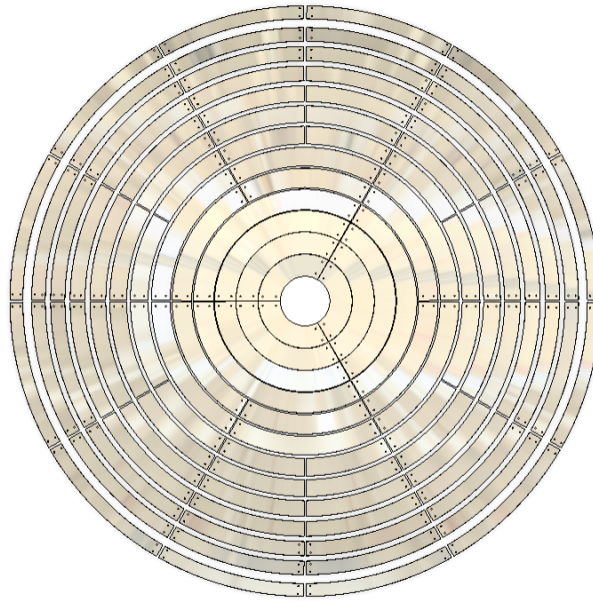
CAD design used for manufacturing the 13 rings used in annular Fresnel reflector.
